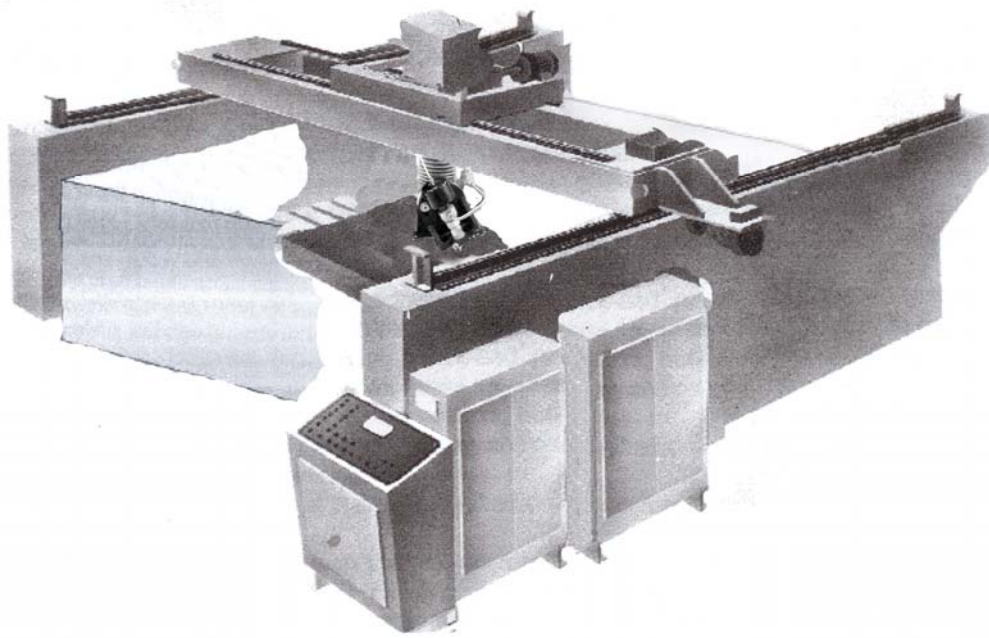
AKM-15-W edging machine modernized for AWJ cutting retrofitted.
